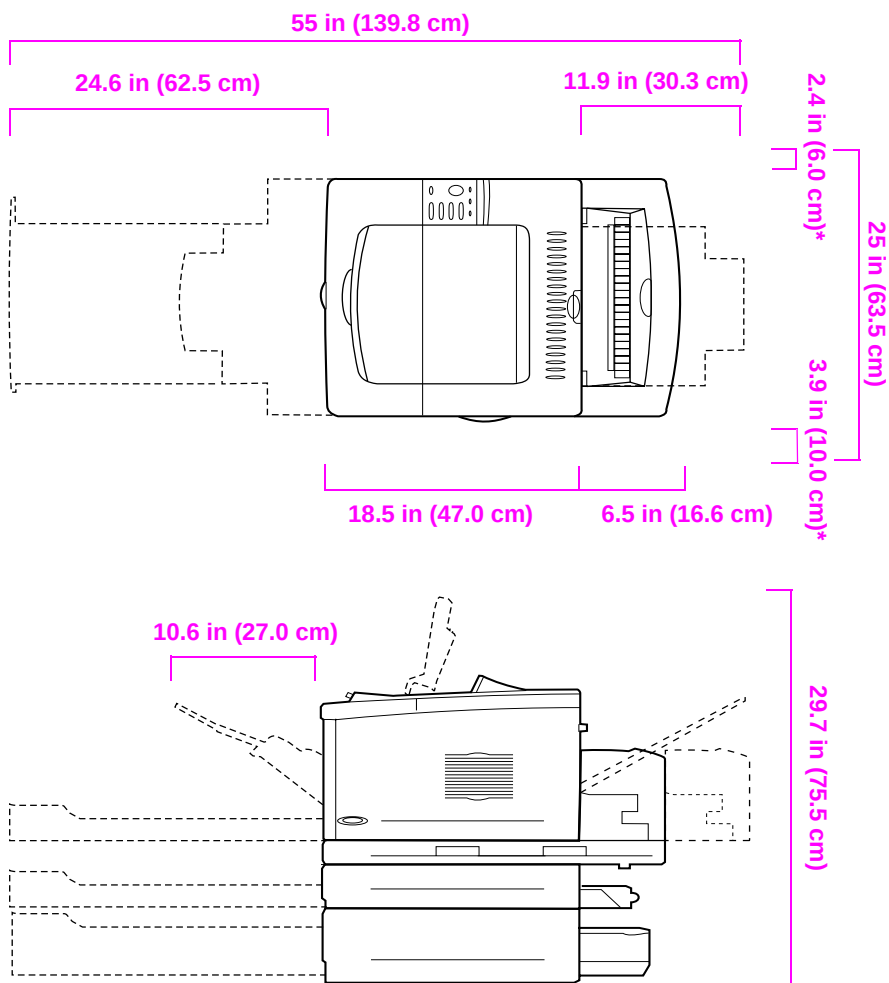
HP LaserJet 5100tn/5100dtn printer dimensions (top and side views)
